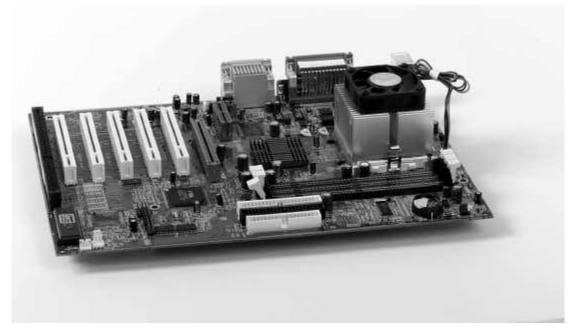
The Heat sink is Installed, the Installation is Ready to be Double-checked
